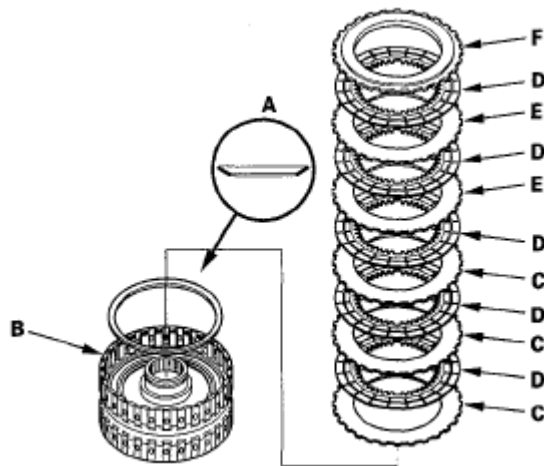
Identifying Disc Spring In 5th Clutch Drum
